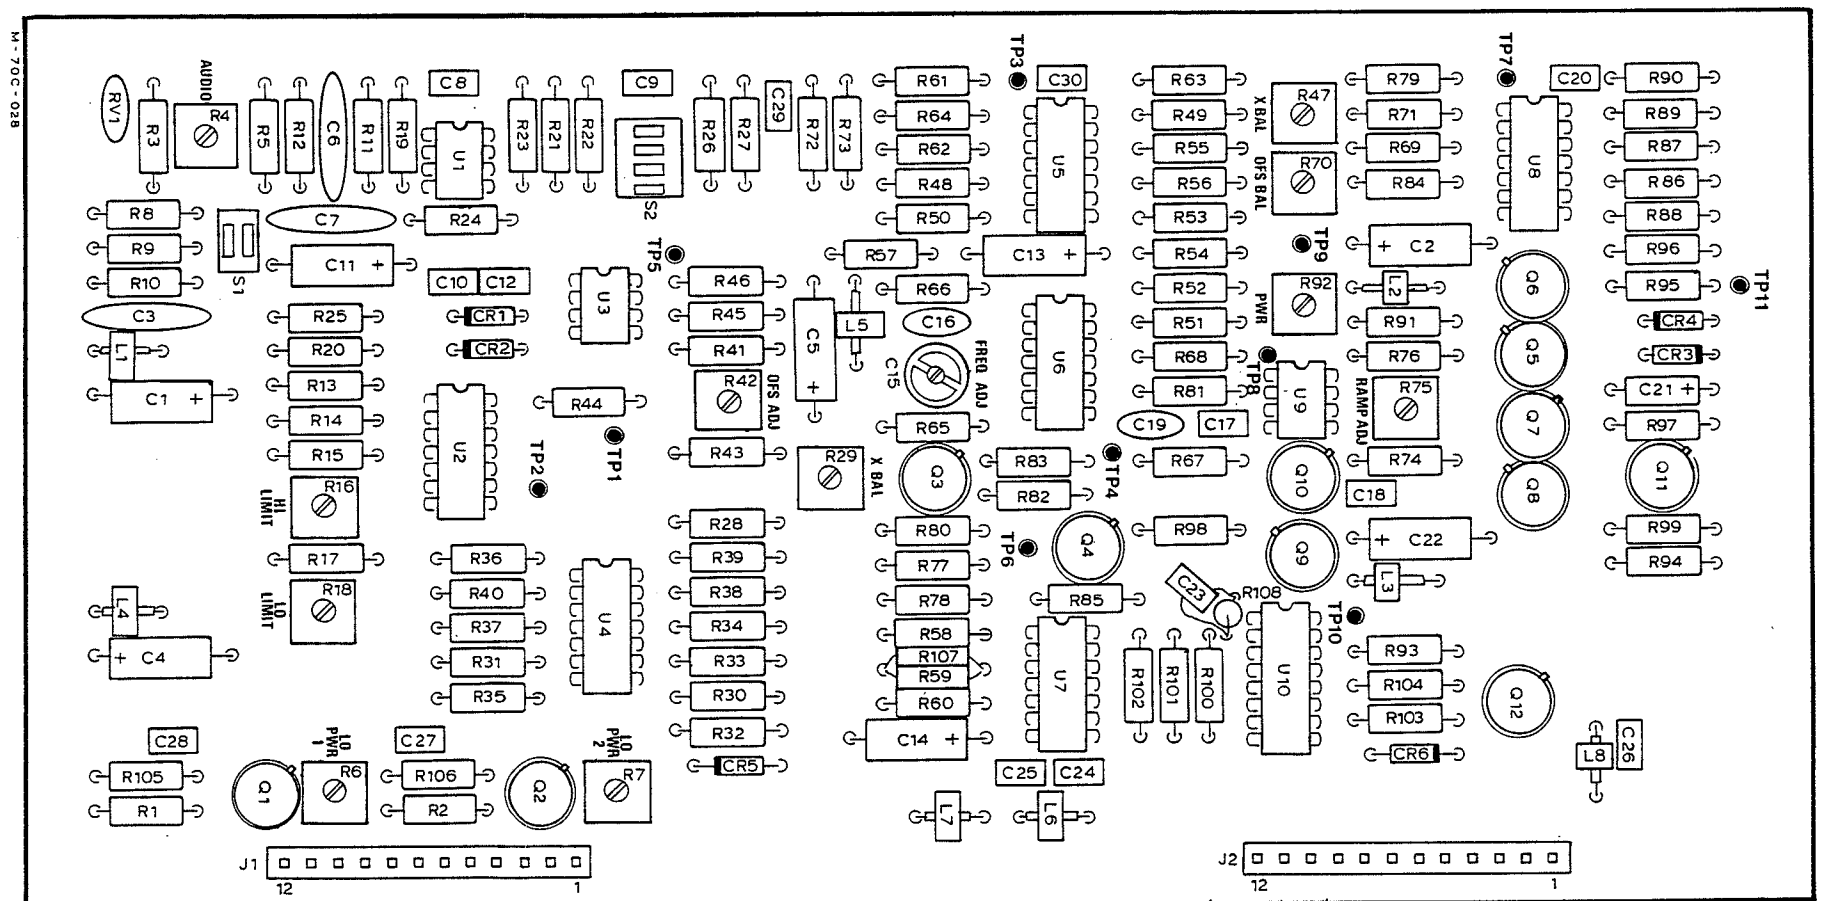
Assembly Detail - NAPE22/1 Modulator Driver PCB Assembly
